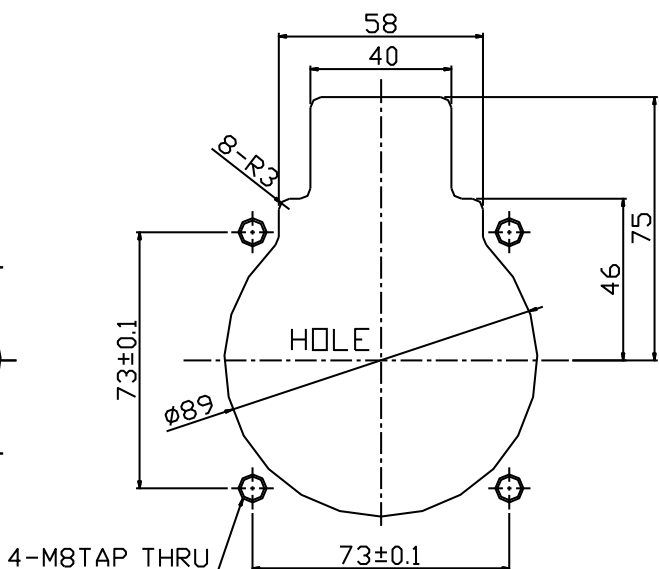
Mounting Hole Dimensions (EST50 and 80)
